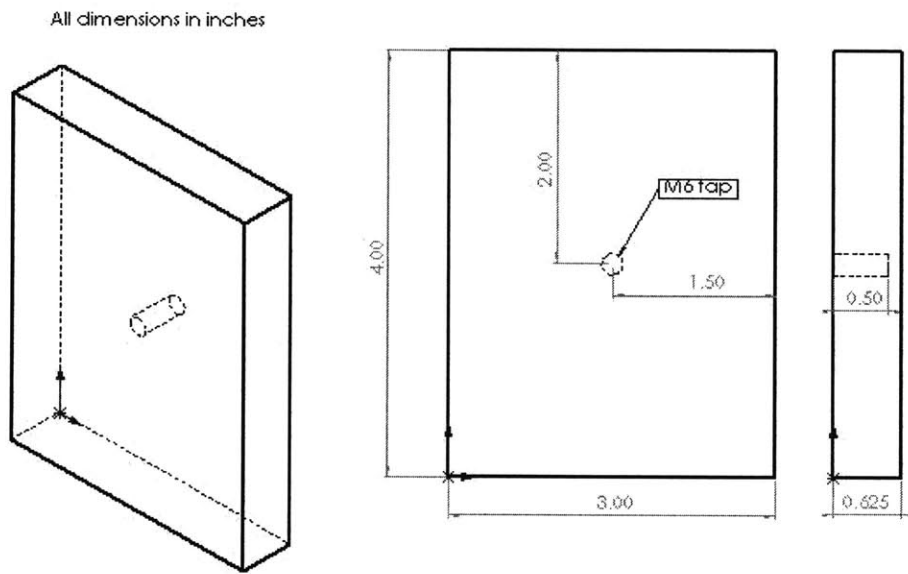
Dimensions of the backing plate for the magnet-across-coils system coils.
